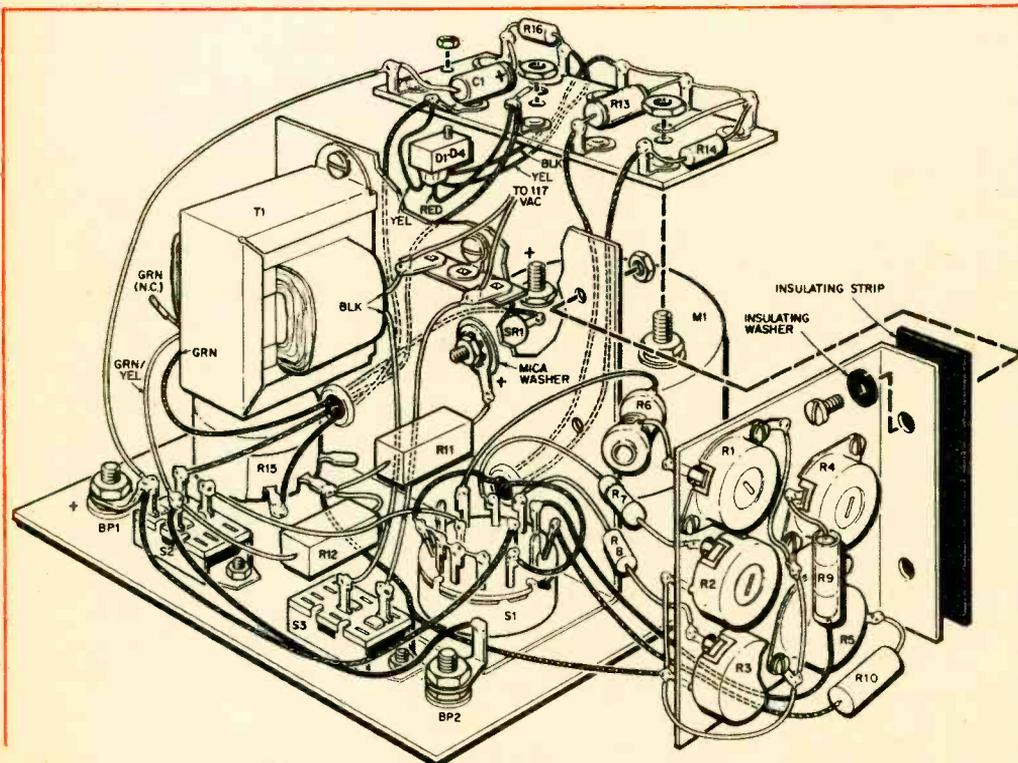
To build Checker in 6 x 5 x 4-in. box, we suggest this layout. The main chassis, which is held to front panel by R15 and S1, is made from 4 x 5-in. piece of aluminum. Potentiometer bracket, lower right (which must be insulated from chassis), is made from 2½ x 2¾-in. piece of aluminum.
